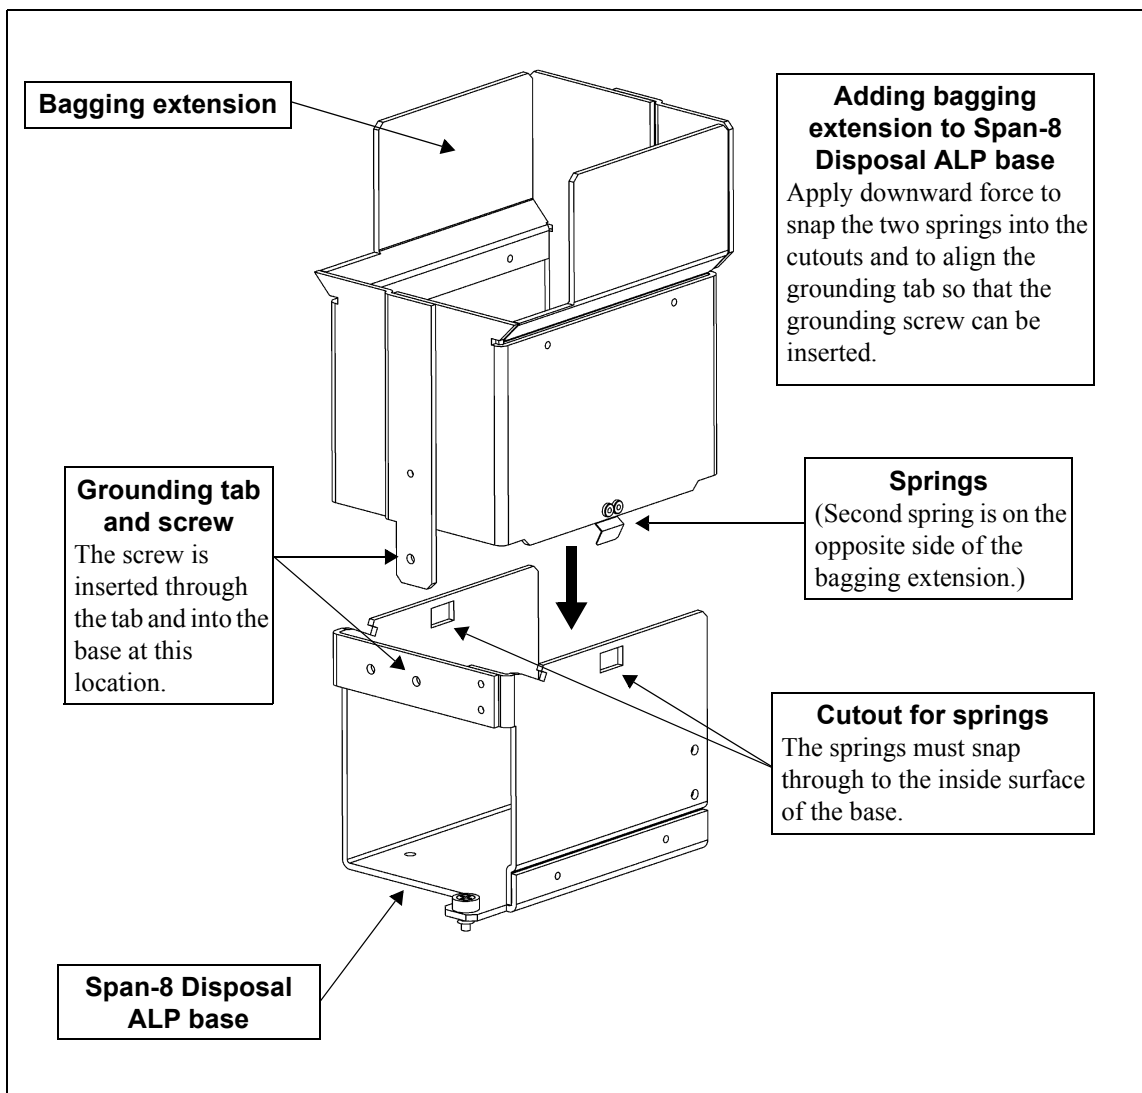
Span-8 Disposal ALP without Slide — exploded
